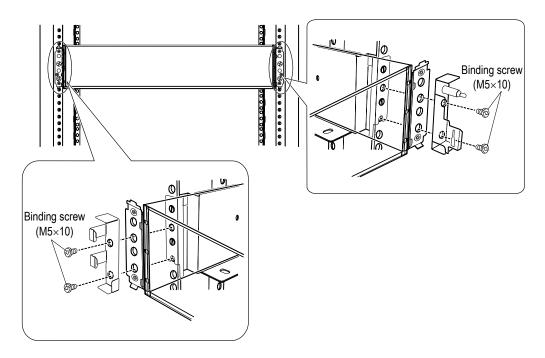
Fastening Front Side of the "Chassis 3" (A Drive Box with the Last Unit ID#)
